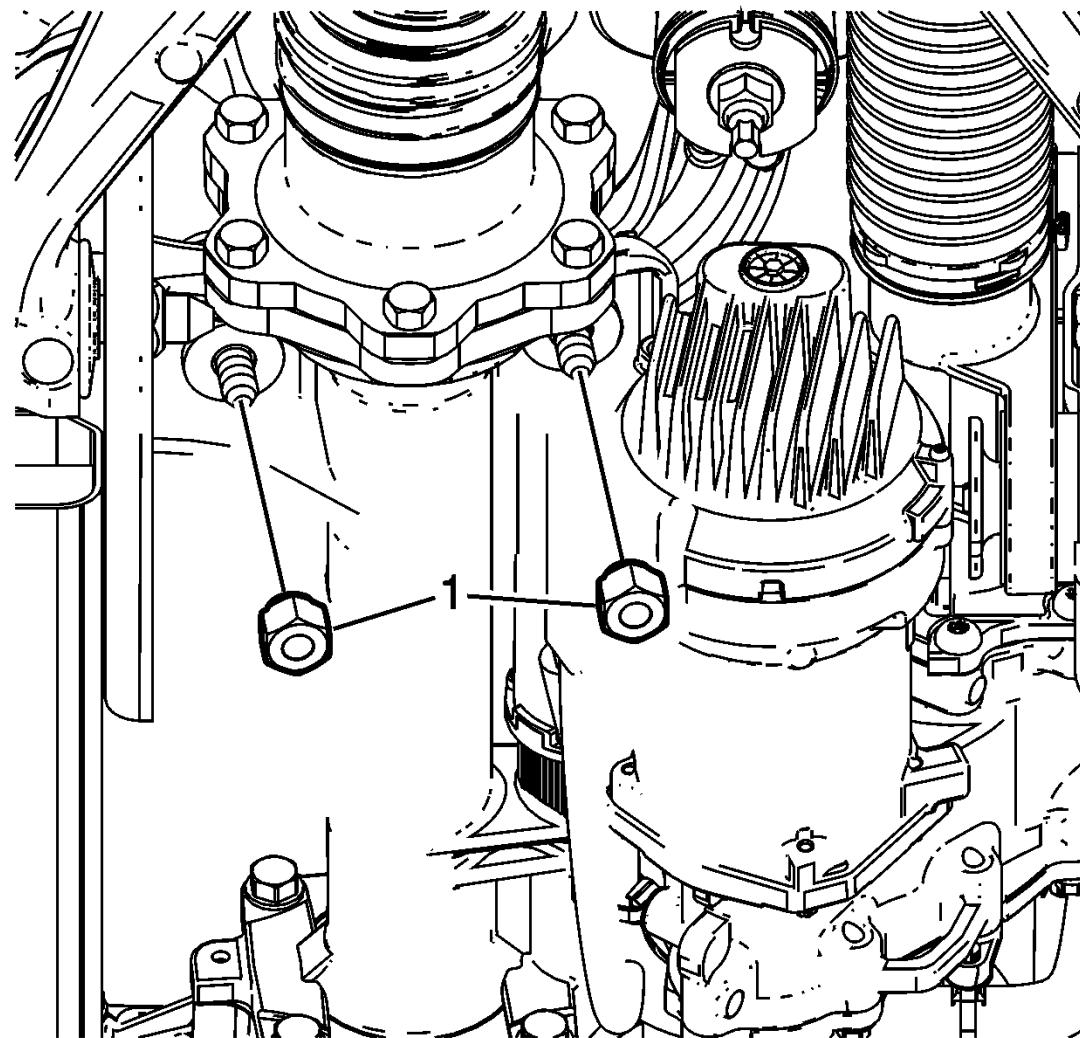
Inner Axle Shaft Housing Washers And Nuts
